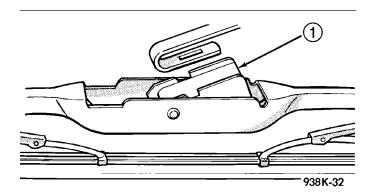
REAR WIPER BLADE - REMOVE/INSTALL
